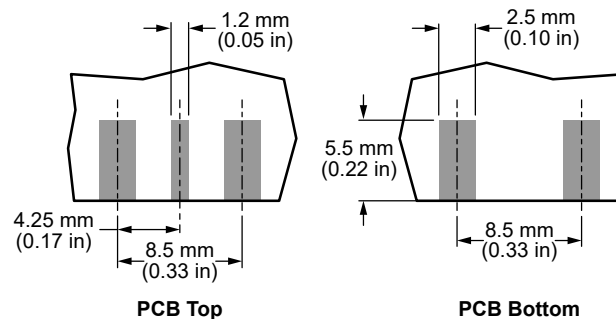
Recommended PCB Dimensions for the CONSMB003.062-G
